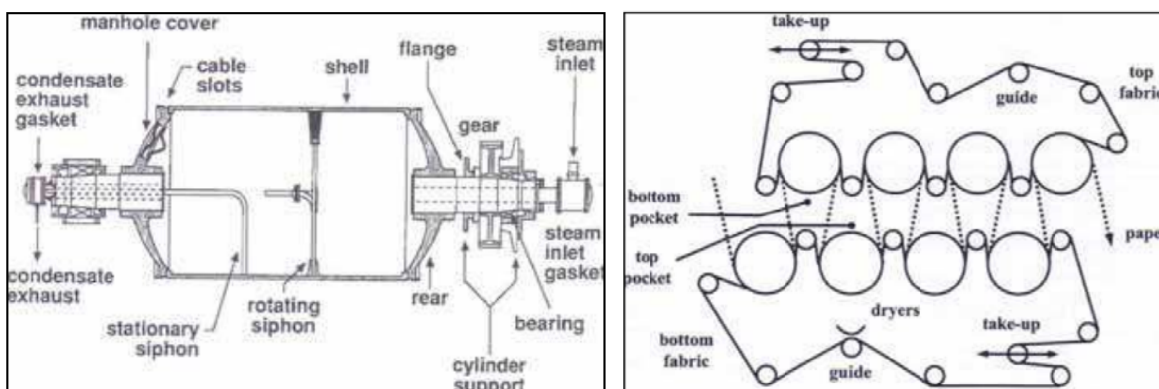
Sectional view of a dryer cylinder and Conventional Two tier dryer configuration.[21.]
